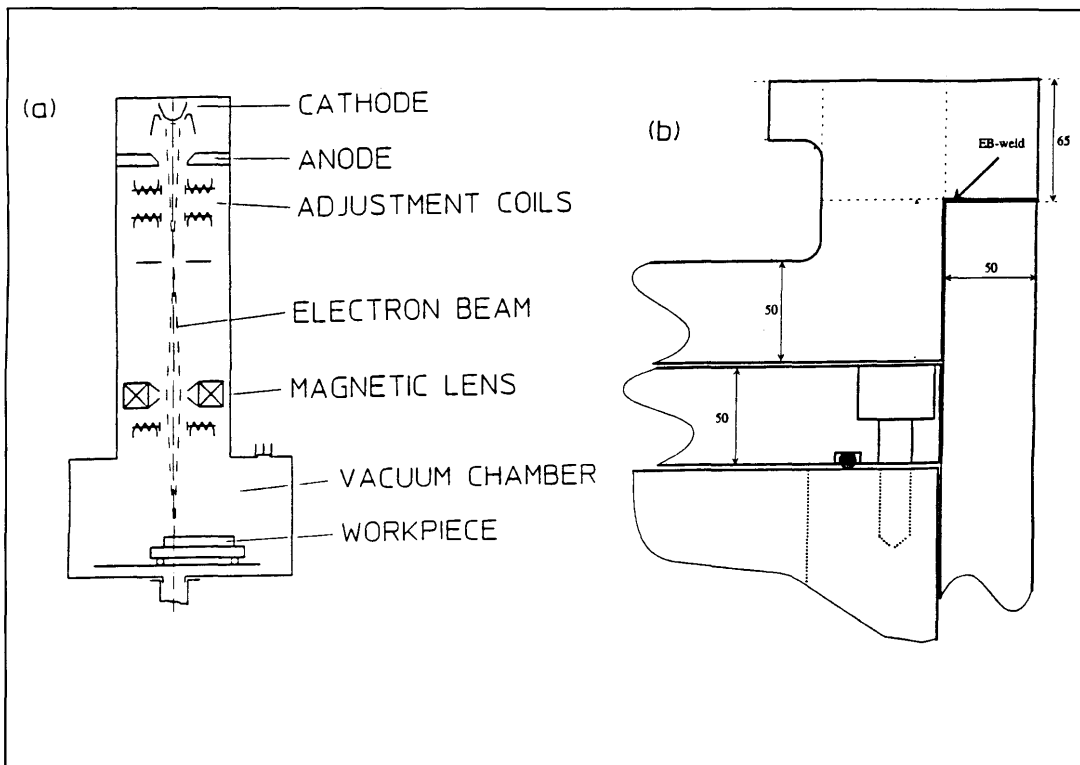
(a) Electron beam welding equipment /10/, (b) canister lid weld joint using horizontal beam /5/.
